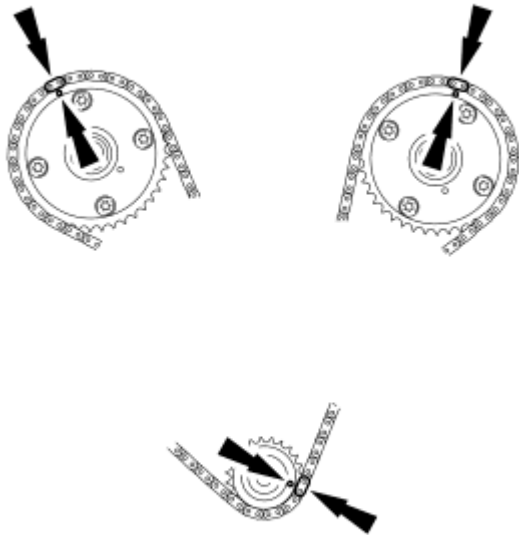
Locating Crankshaft Timing Chain Sprocket
